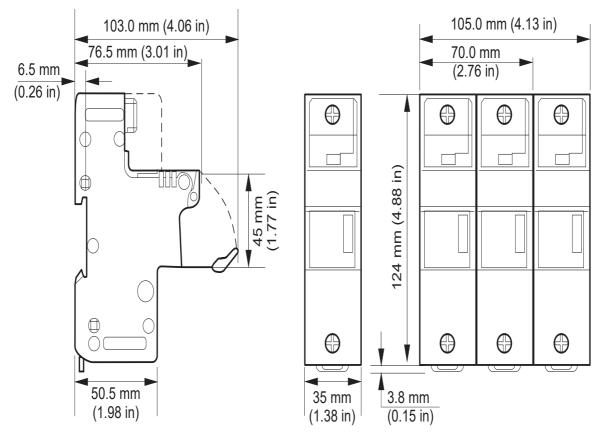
Fuse holder dimensions: US221 (22x58mm)
